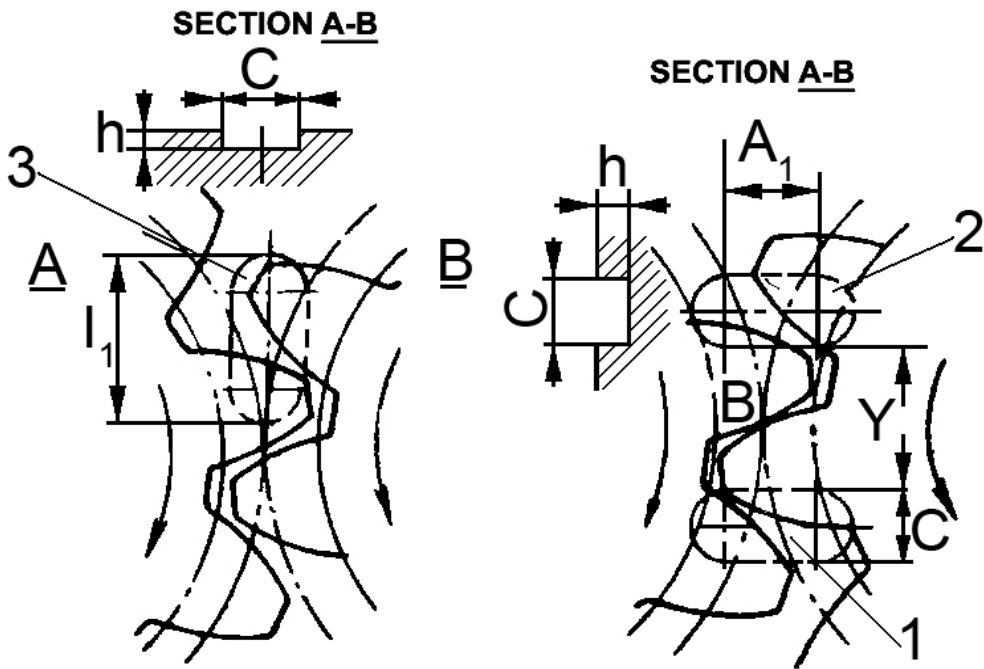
The drainage of the blocked fluid through the sewer grooves :
